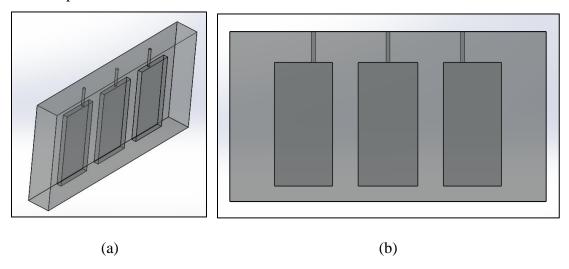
a) Isometric view and (b) Front view of Glass Capsule
